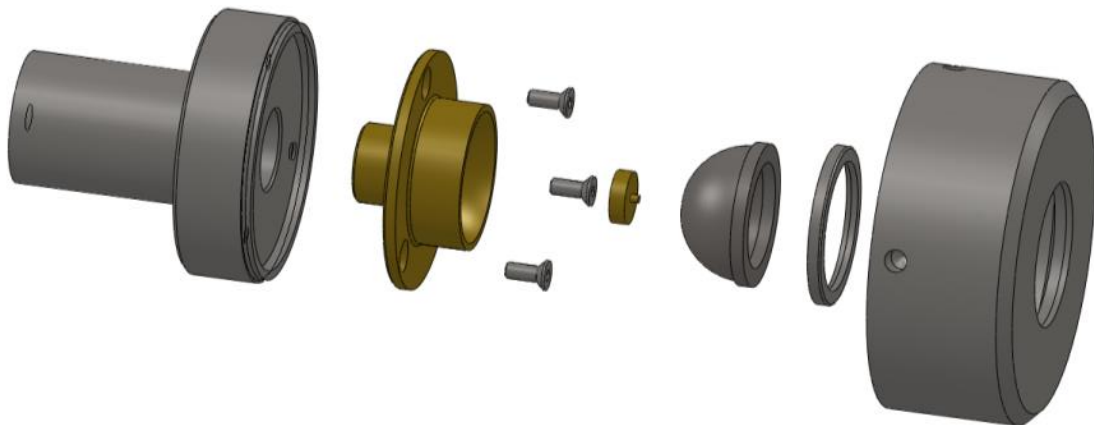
Exploded view of the clamping device adopted to machine the acetabular cup.
